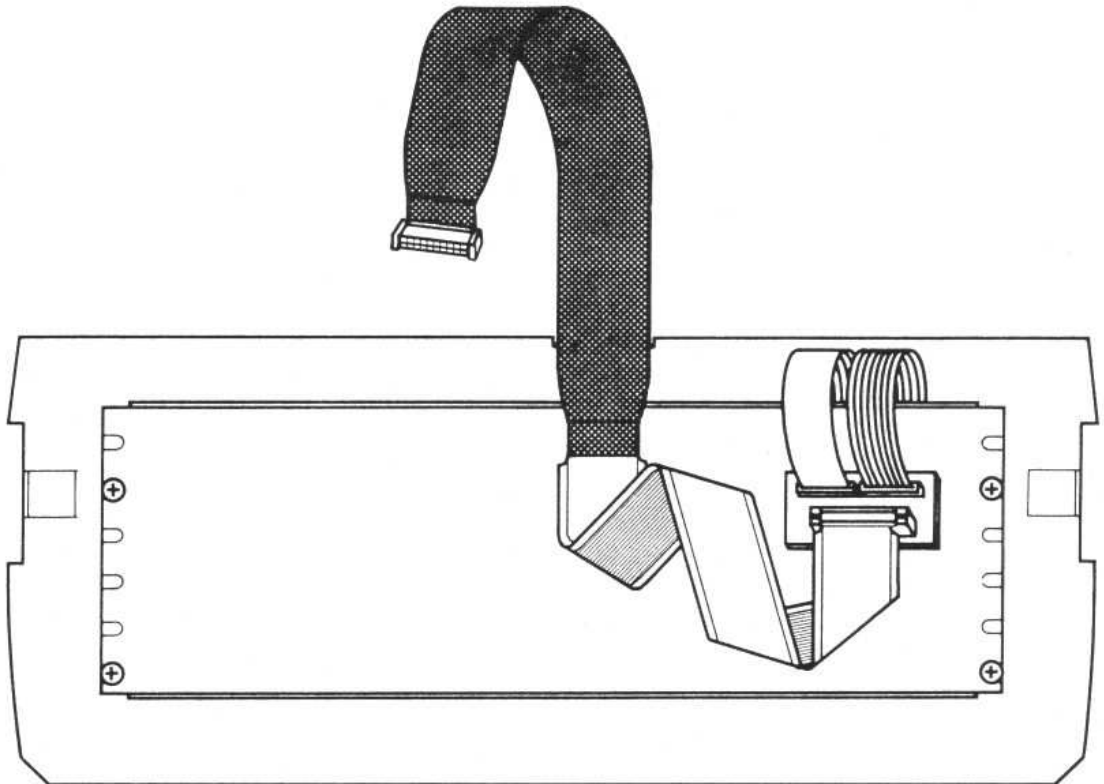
KEYBOARD AND BEZEL ASSEMBLY—UNDERSIDE
